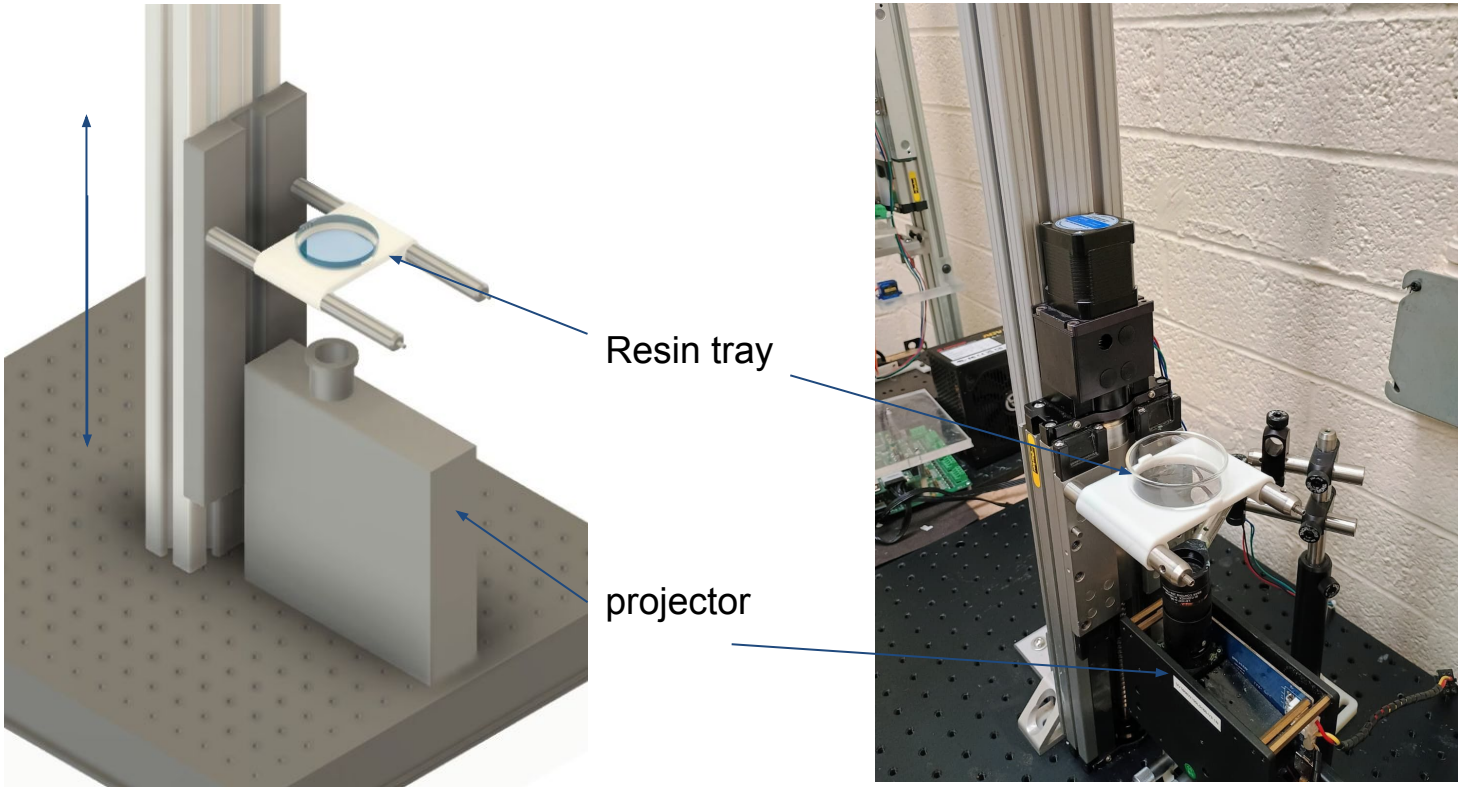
Volumetric 3D printer CAD model (left), & actual set up (right)
